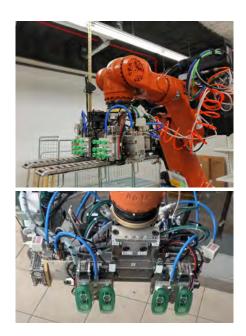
Real prototype of the gripper assembled on an industrial robotic arm KUKA KR60-3.
